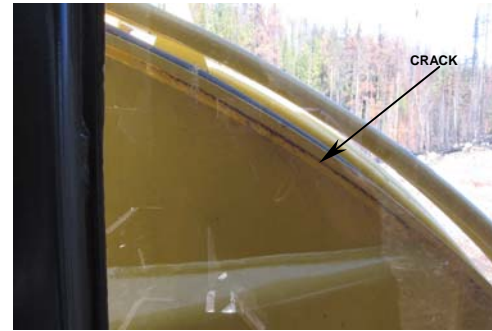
Cracking of the boom of WBM Weldco-Beales KOM PC270LC-6 visible from operator cab
